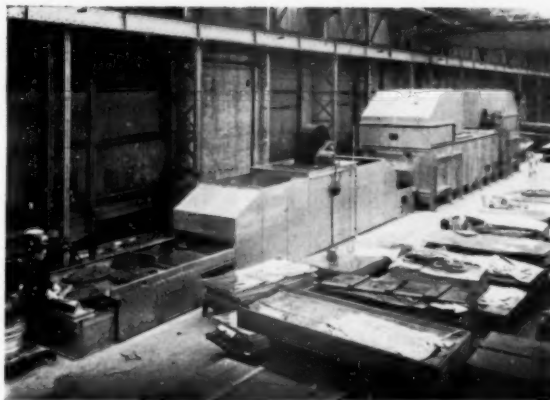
A continuous "flash" annealing furnace for aluminium and aluminium alloy sheets and circles by Stordy Engineering, Ltd.
